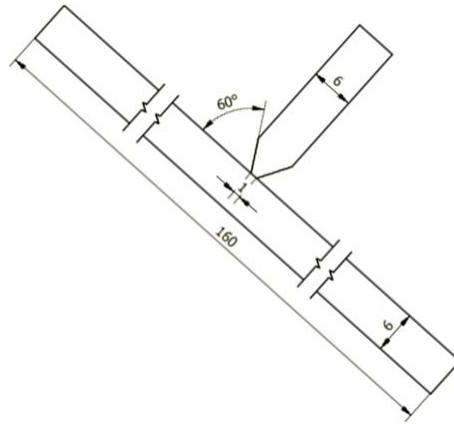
Joint preparation for MIG welds (dimensions in mm)
